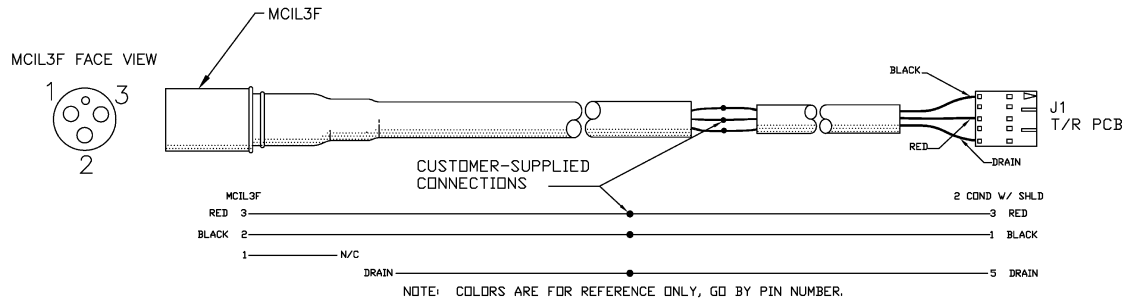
ATM-885PCB Transducer Cable Wiring Diagram
